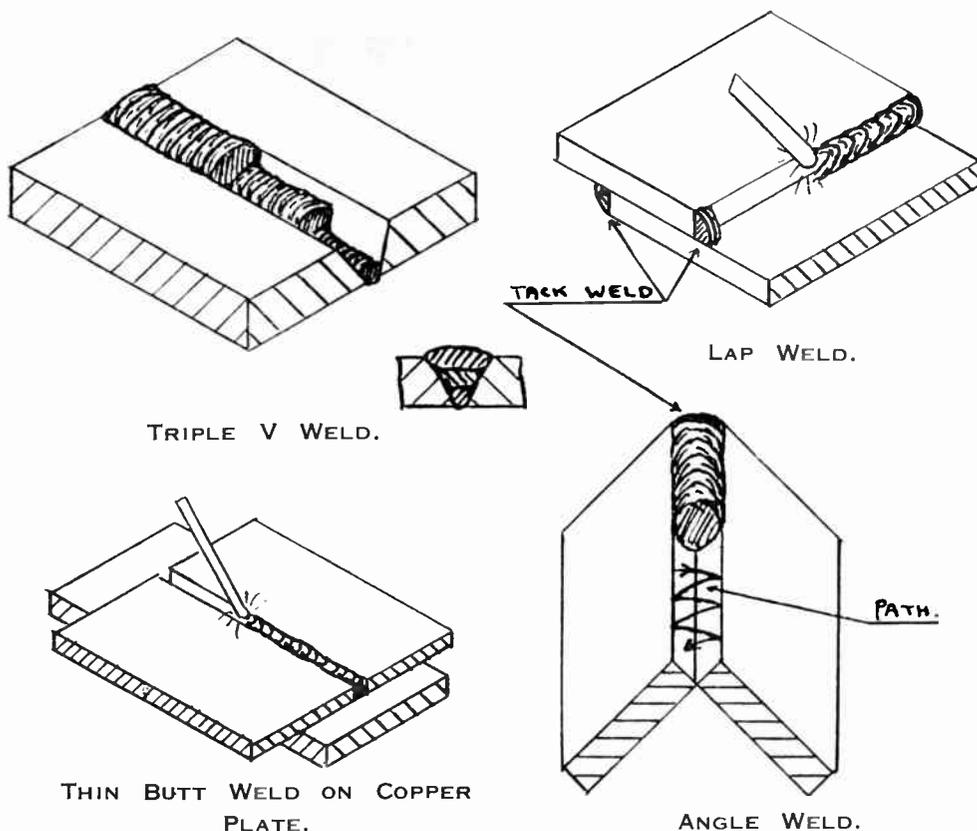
THE MOST COMMON FORMS OF WELDS.
